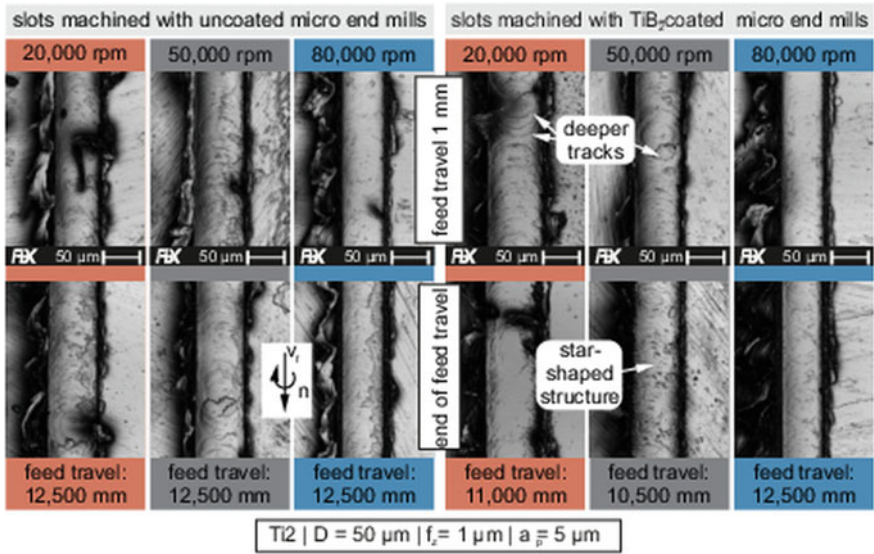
Slot bottom topography and tool wear depending on spindle speed and tool coating for micro end mills with a diameter of 50 μm according to [18]
